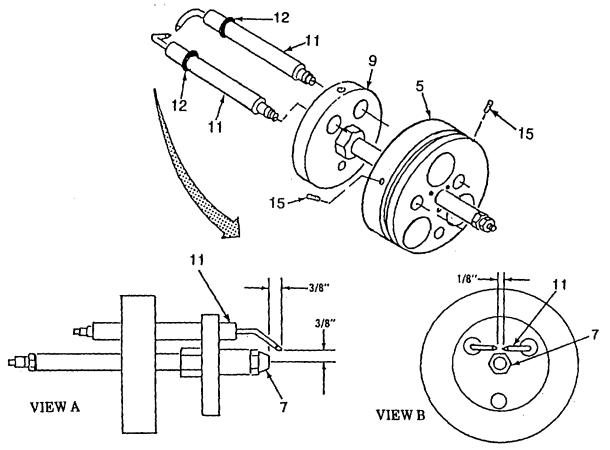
Burner Assembly (Sheet 4 of 5)
